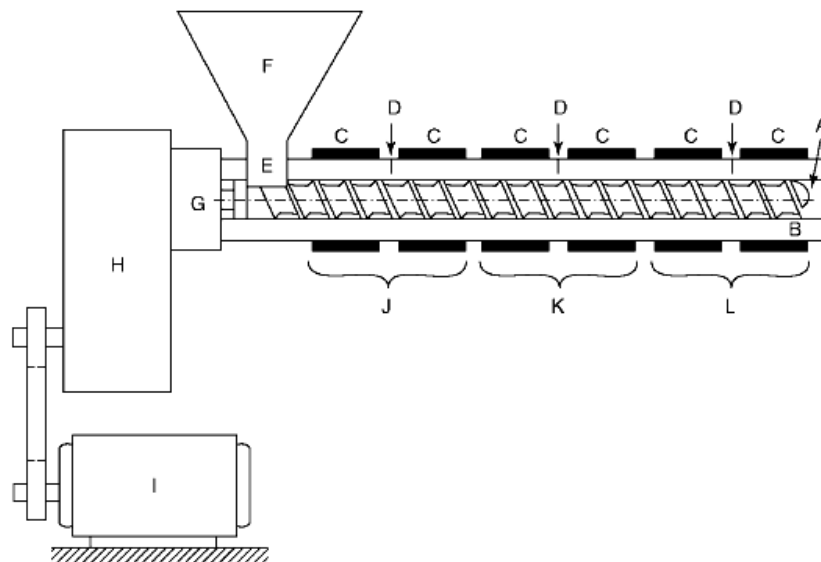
Parts of an extruder: A, screw; B, barrel; C, heater; D, thermocouple; E, feed throat; F, hopper; G, thrust bearing; H, gear reducer; I, motor; J, deep-channel feed section; K, tapered channel transition section; and L, shallow channel metering section (20).
